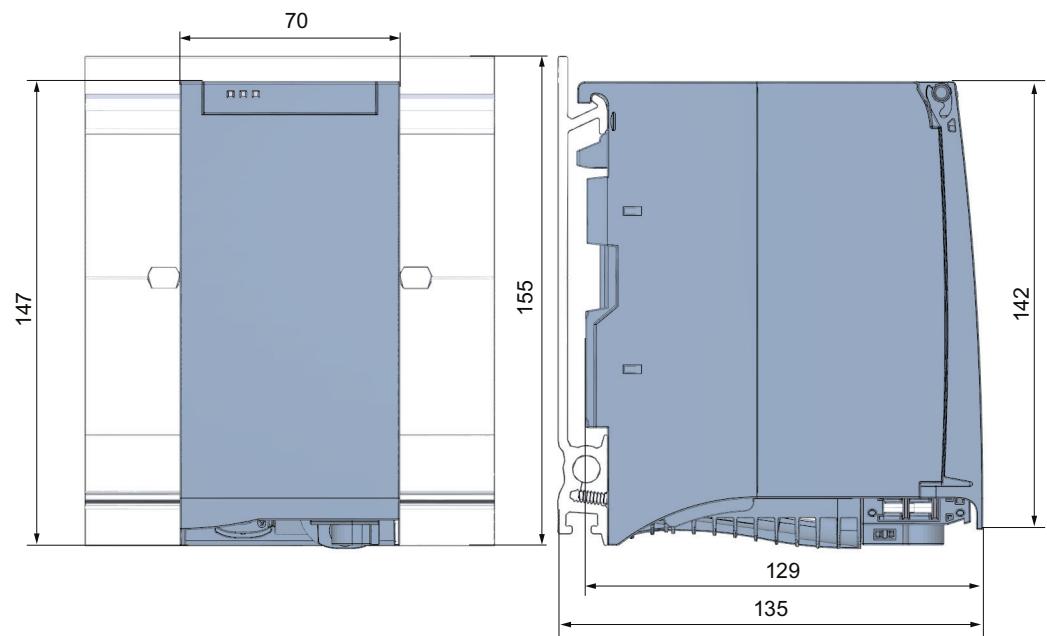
Dimensional drawing of the PS 60W 120/230V AC/DC module
